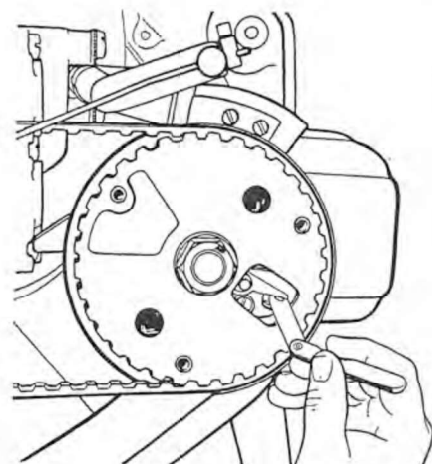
Pulley cover removed showing method of adjusting contact points. Point gap is approximately 0.020, but the two sets of points must be synchronized using a timing light such as that shown in Fig. E89.
